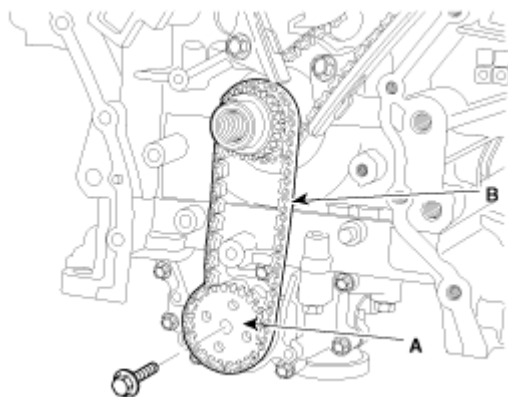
Identifying Oil Pump Chain Sprocket & Oil Pump Chain
